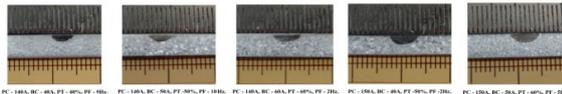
Macro structure for PCTIG welded samples (condition 1 to 5)
